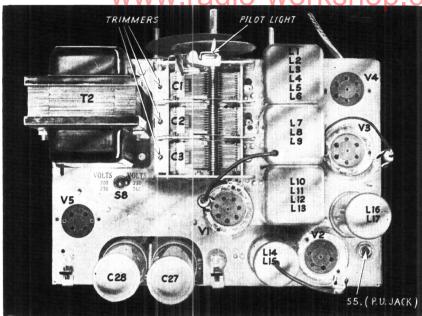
Plan view of the Model 260 chassis. Valves and valve screens have been removed.
